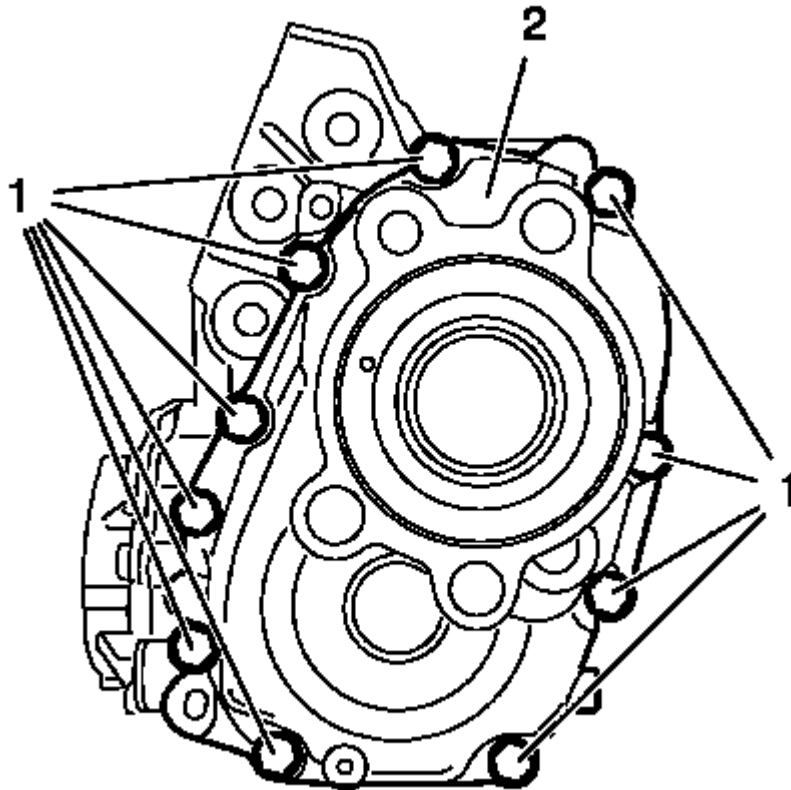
Locating Transfer Case Rear Extension Housing Bolts
